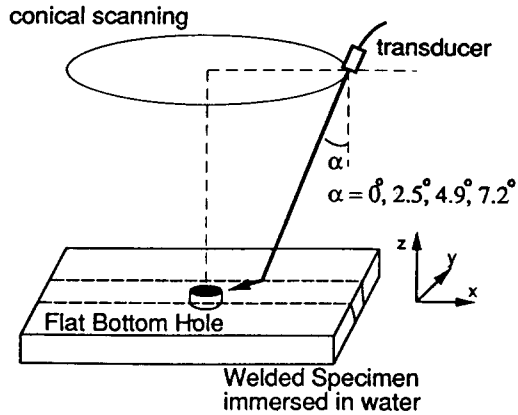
Schematic diagram of the TOFE sizing setup for 5 mm diameter flat-bottom holes fabricated in a mild steel welded specimen (immersion testing).
